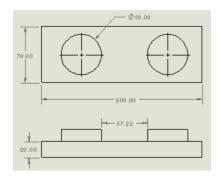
PuckHoover[™] Remote Control Dimensions (in mm)
